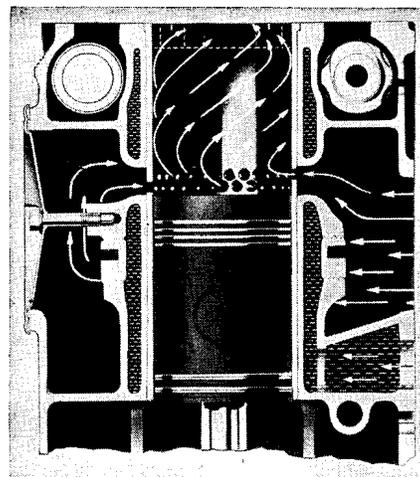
Section of Cylinder Block Showing Air and Water Passages.
